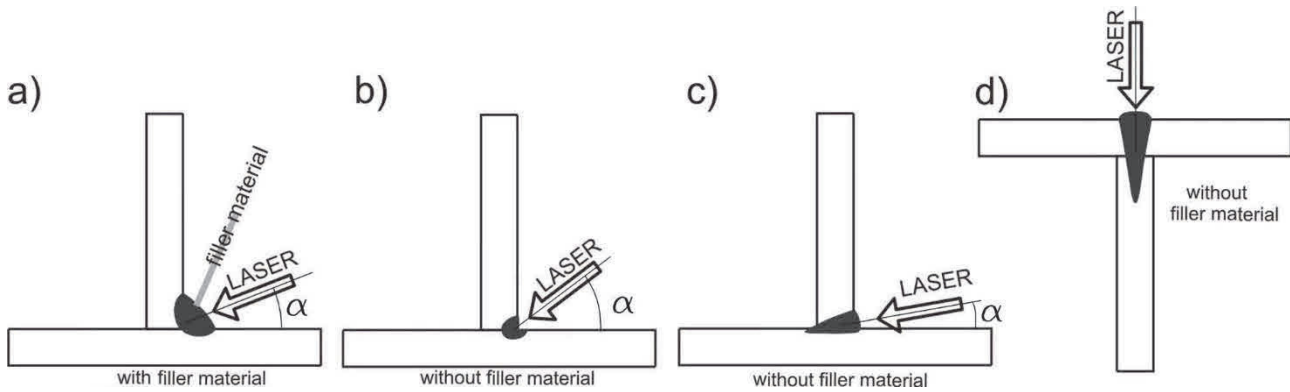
Laser welded T-joint: a) with filler material, b) without filler material, c) butt welded joint, d) I-core T-joint
